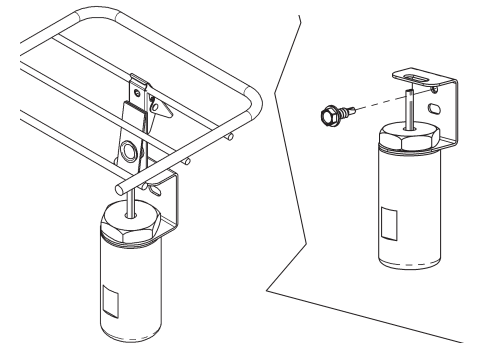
Remote Thermobuffer Surface or Clip Mounting
